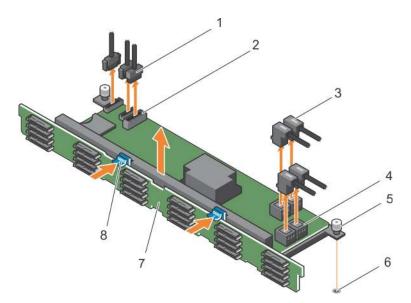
Removing the 1.8-inch (x24) hard drive backplane
